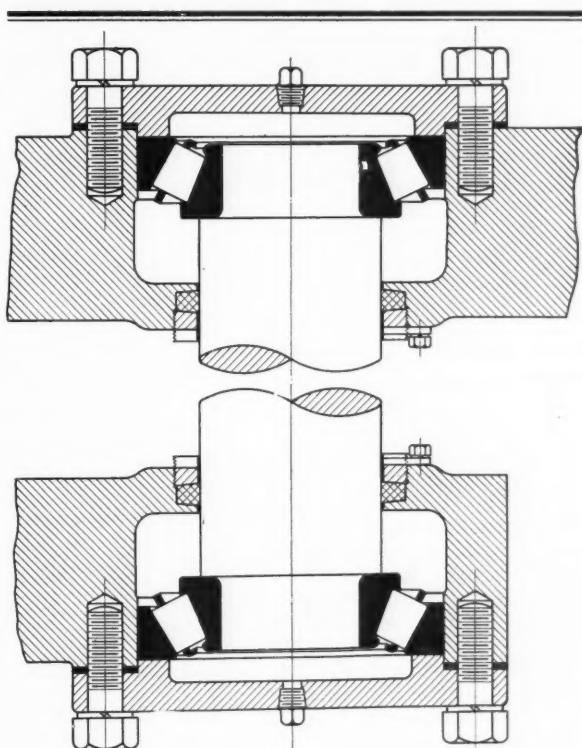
Bearing Mounting for Vulcanizer Doors. The Method of Adjustment Holds the Doors Permanently to a Close Fit with the Shell.
